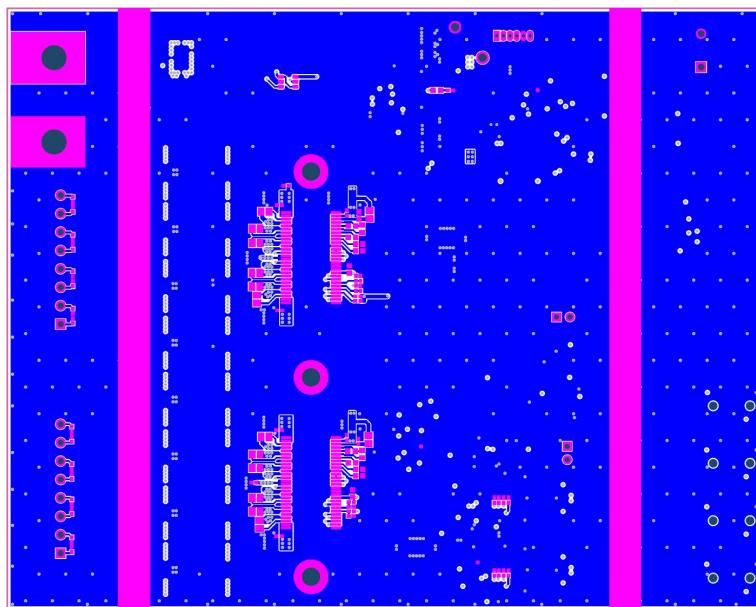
TIDA-00733 Bottom Circuit Board Layer
